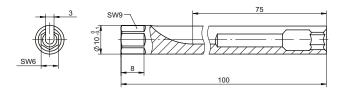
Mounting tool Type 1300A165, SW9 ... SW6
